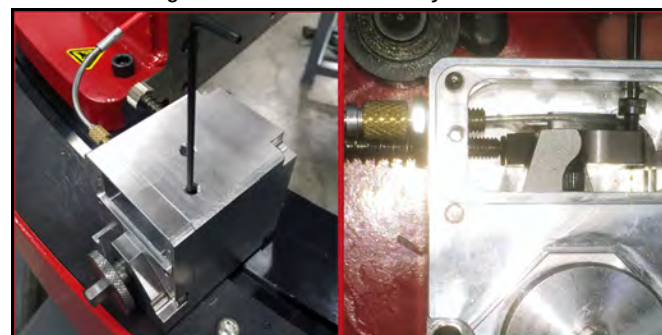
LOCATION OF M4 SCREW (LEFT); CABLE END UNDER M4 SCREW AND JAM NUT WITH ADJUSTING BOLT (RIGHT)
